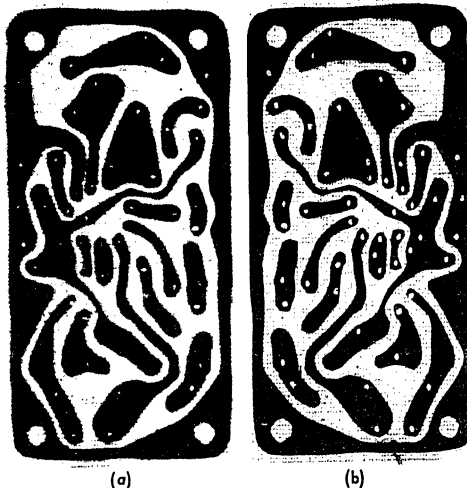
An unobstructed view of the top (a) and bottom (b) of the printed circuit board used in Fig.8.
